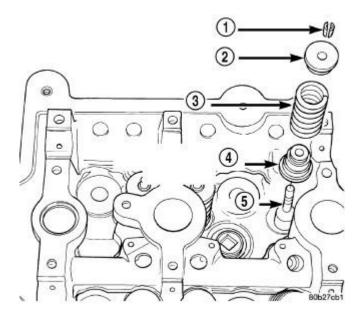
Valve Seal & Spring Courtesy of CHRYSLER LLC
